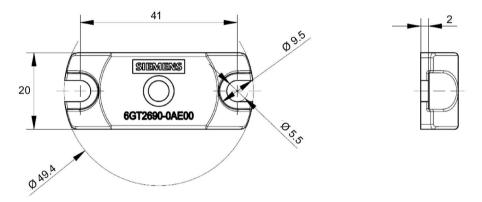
Dimension drawing of fixing hood 6GT2690-0AE00
